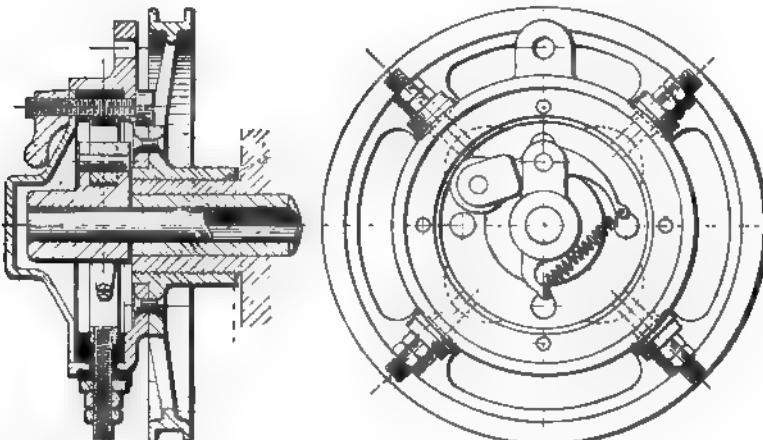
Type of French Wipe-Contact Circuit Interrupter used on Circuits having Magnetic Tremblers on the Coils. As shown, the roller comes into contact with the arc-shaped plates representing terminals of each of the four coil and plug circuits, making each of them in succession.
